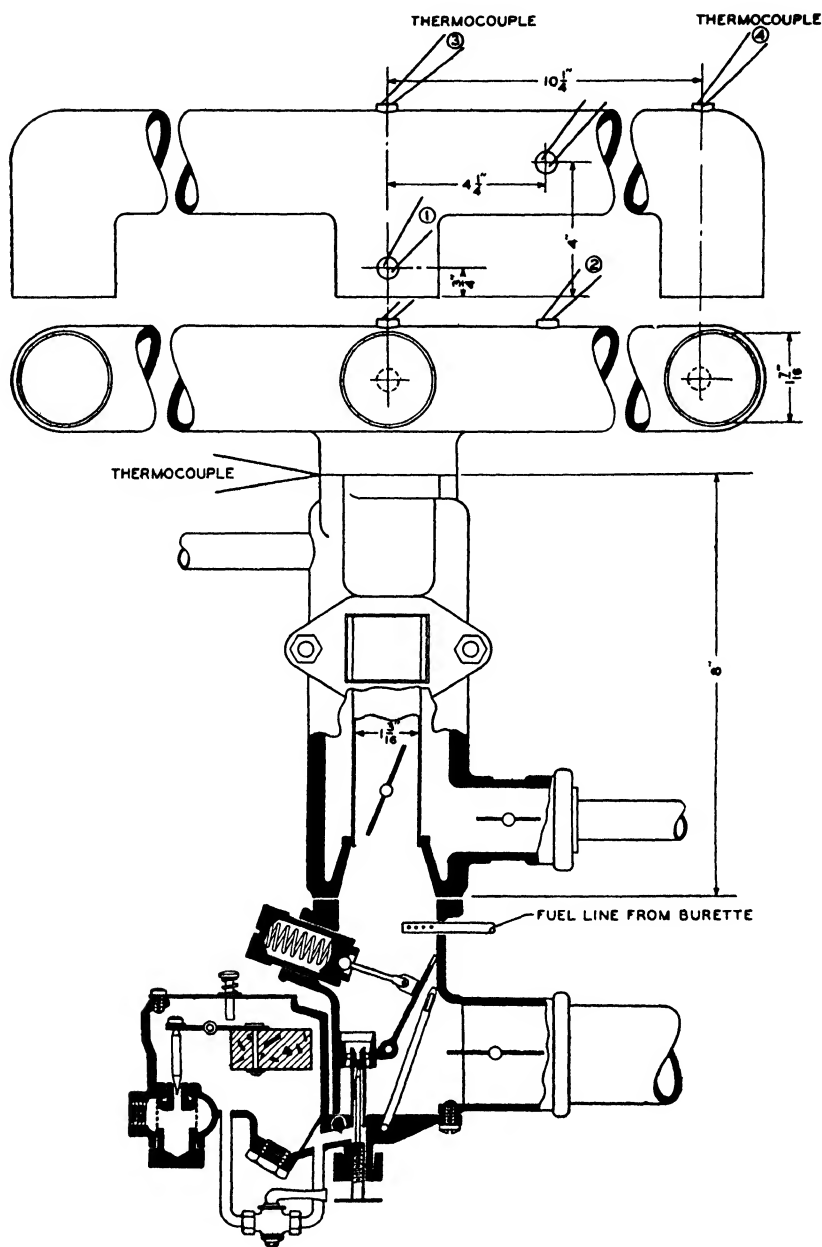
INTAKE MANIFOLD AND CARBURETTOR USED BY GRANGER BROWN IN ACCELERATION TESTS
